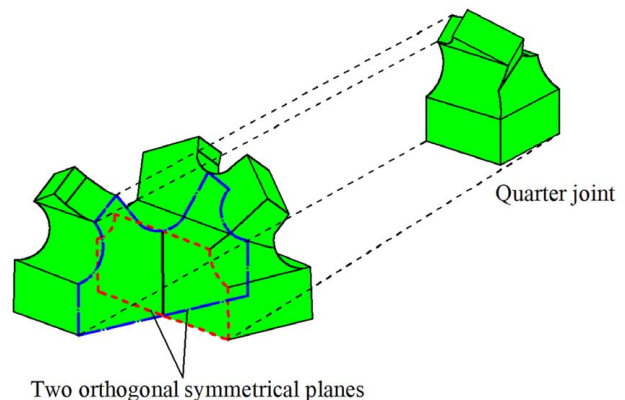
Single welded joint and its quarter part that is cut along its two orthogonal symmetrical planes
